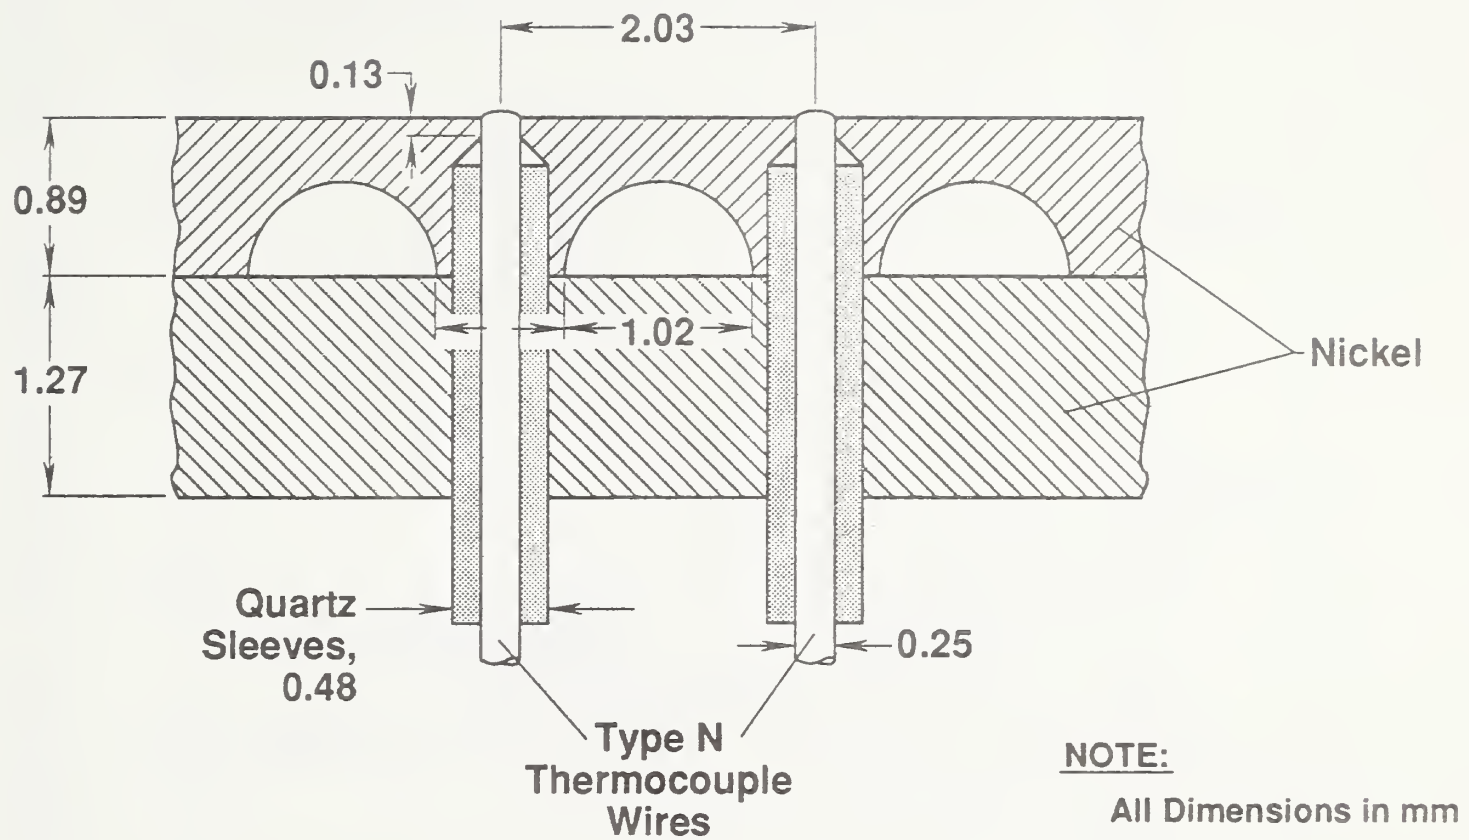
Method for attaching thermocouples to the heated side of the pin-fin specimen.
